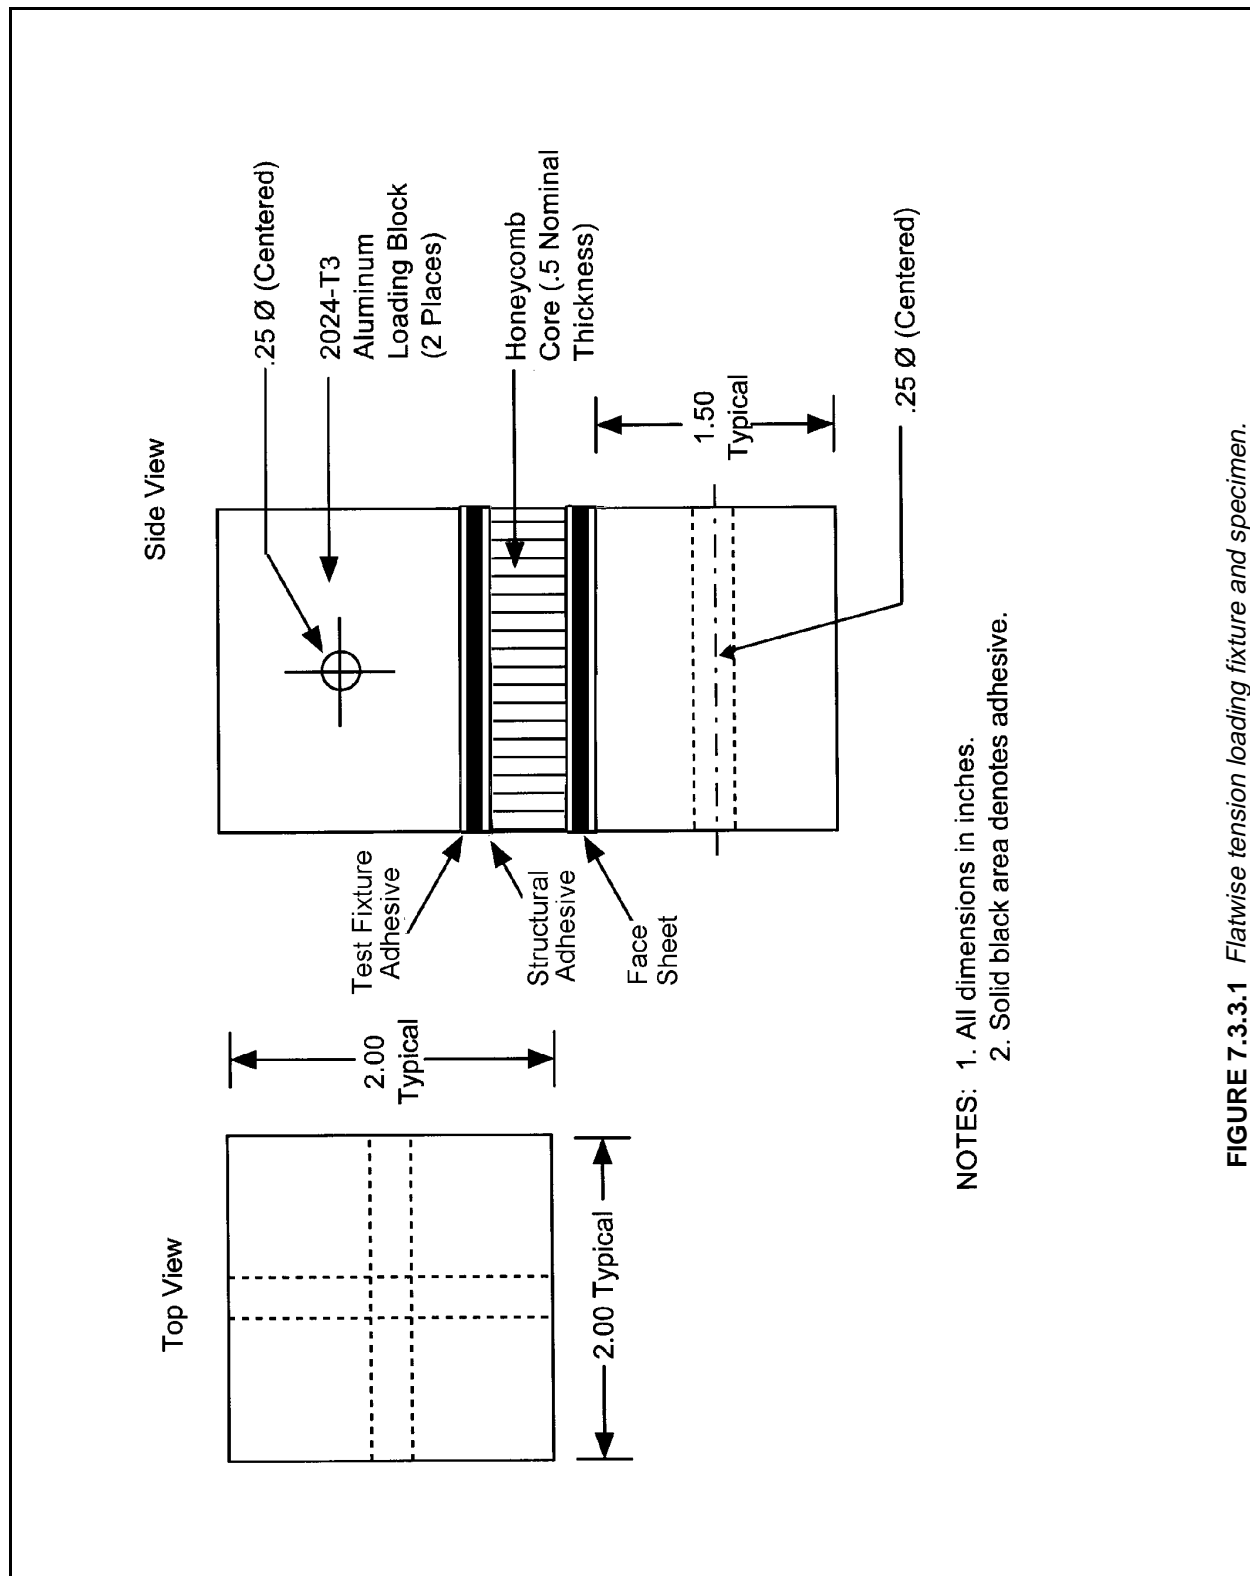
Flatwise tension loading fixture and specimen.
